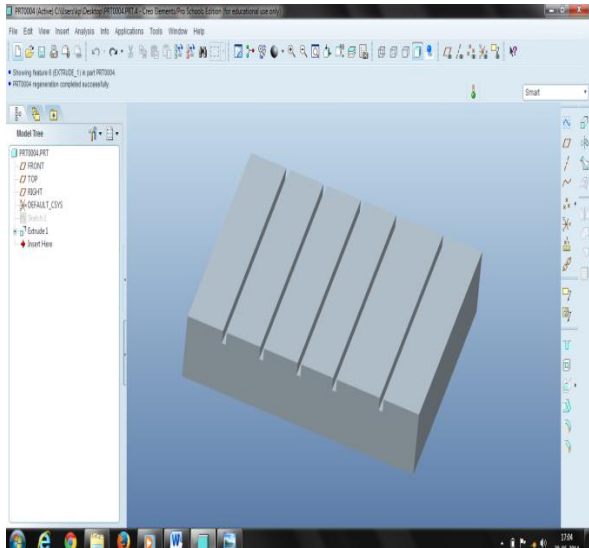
Shows the Isometric and Front View of micro channels drawing.
